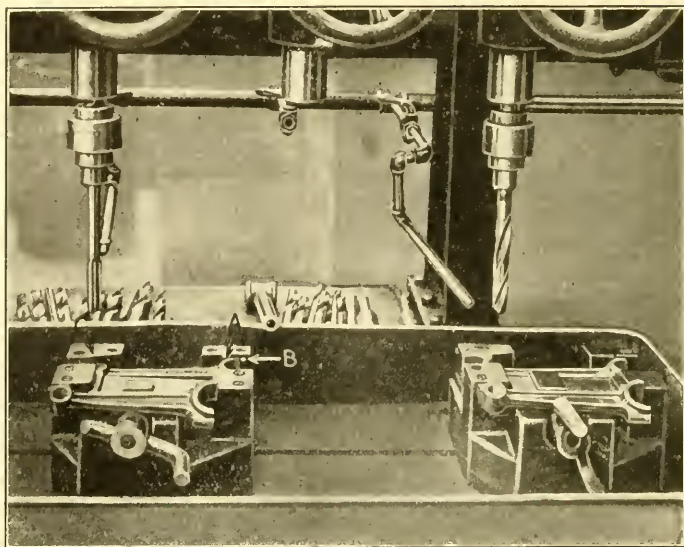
DRILLING AND REAMING PISTON PIN HOLES
